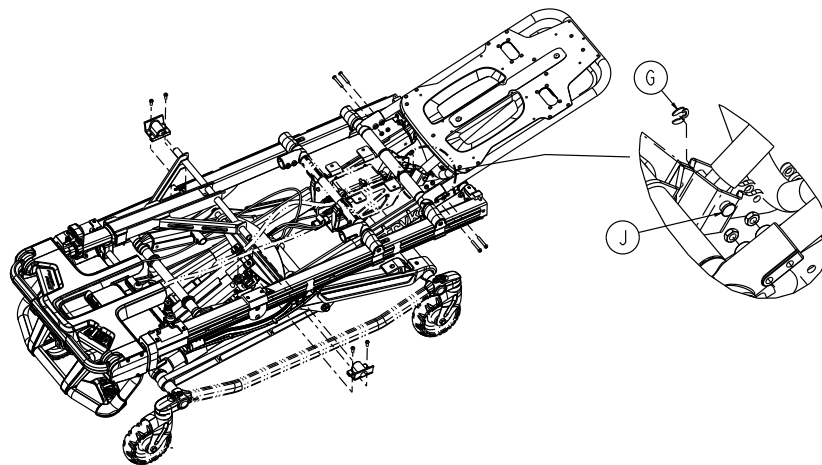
Remove the truarc ring and Fowler cylinder pin
